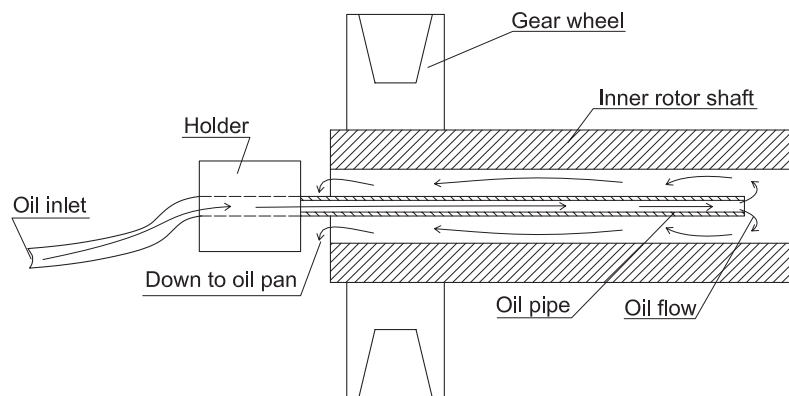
Proposal for oil cooling system in the inner rotor shaft.
